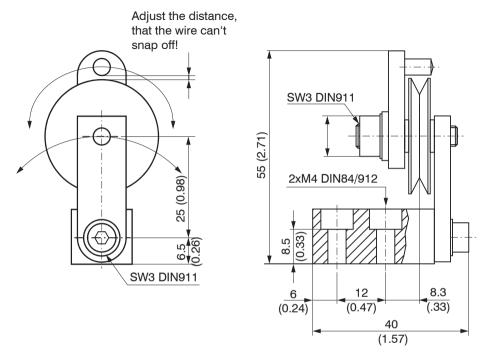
Guide pulley TR1-WDS with mounting socket, dimensions in mm (inches)
